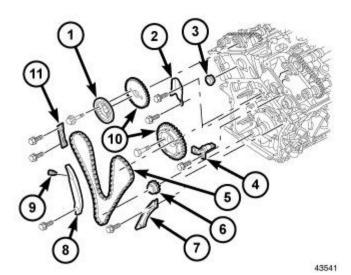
TIMING DRIVE SYSTEM - PRIMARY Courtesy of CHRYSLER LLC
